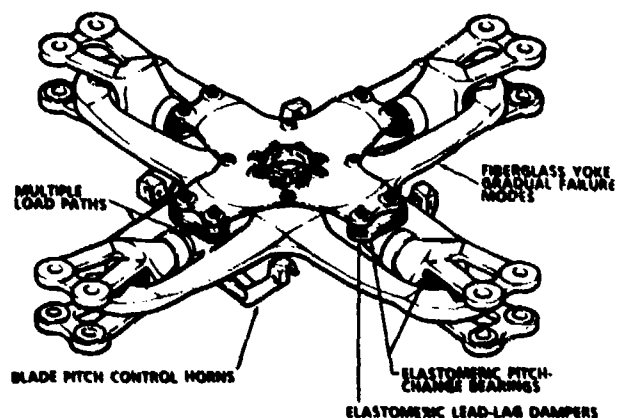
ROTOR HEAD OF BELL OH-58D (AHIP)
